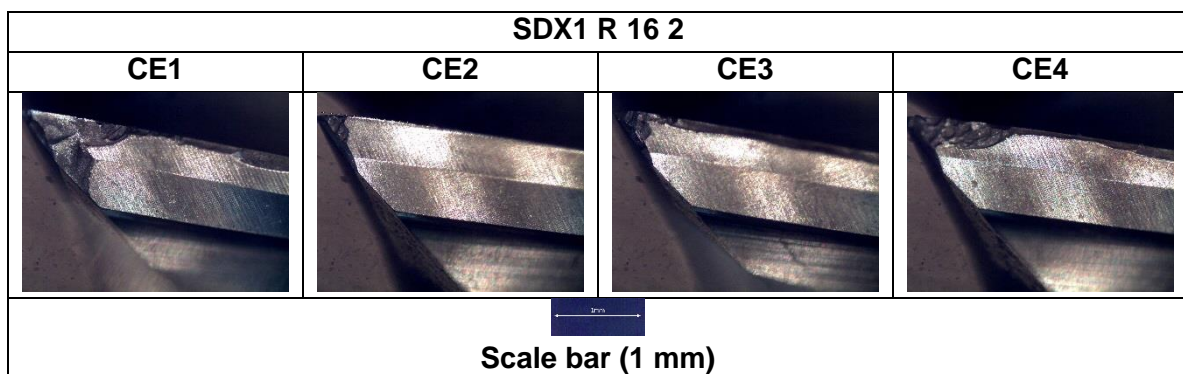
Examples of BUE and chipping on the cutting edges when milling super duplex 2507
